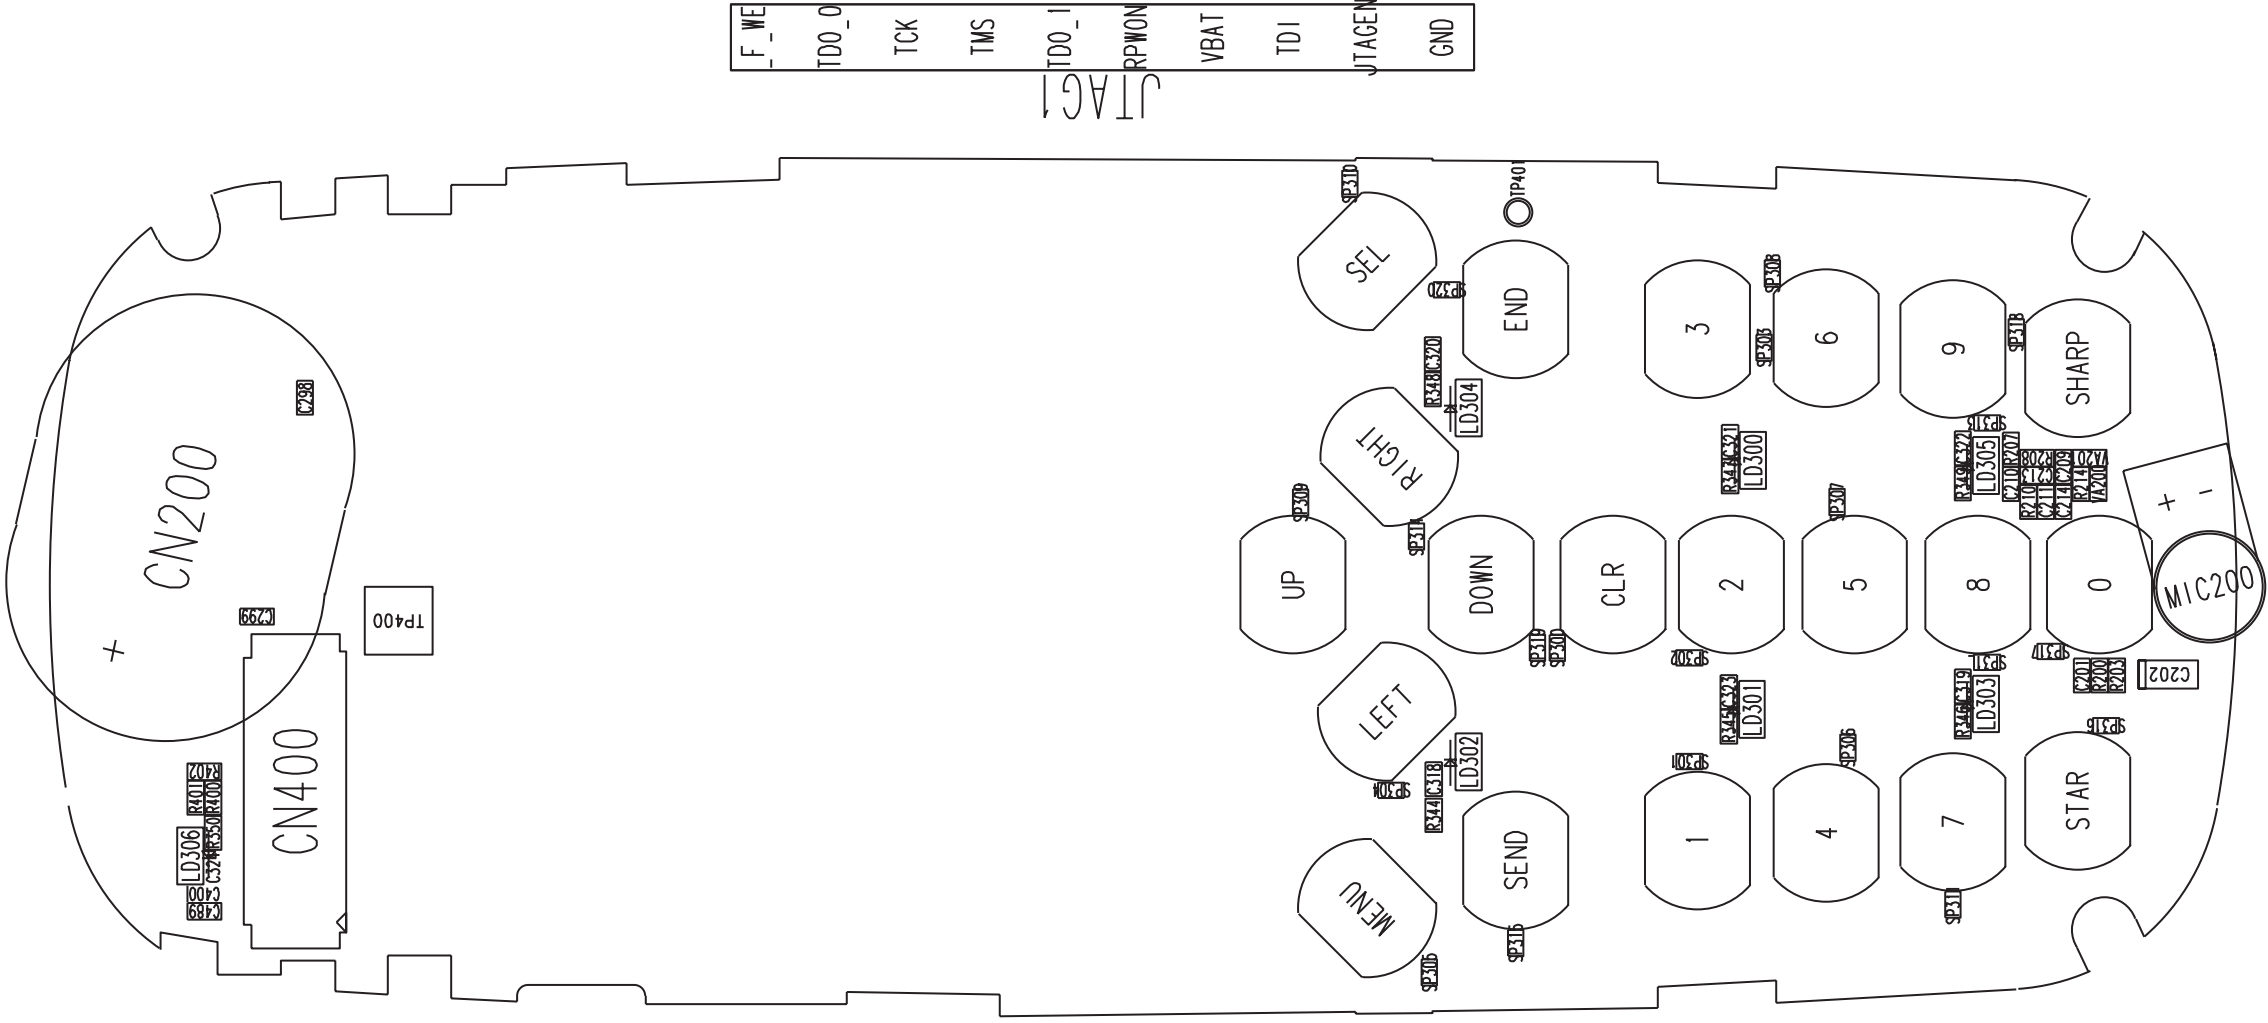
B2070 TOP SIDE PCB LAYOUT
